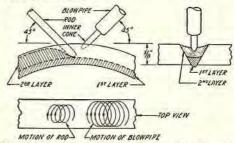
The motion of blow-pipe and welding rod are illustrated. The upper views illustrate the method for building up the weld in layers when welding heavy walled pipe. A third layer is required which is not shown.
